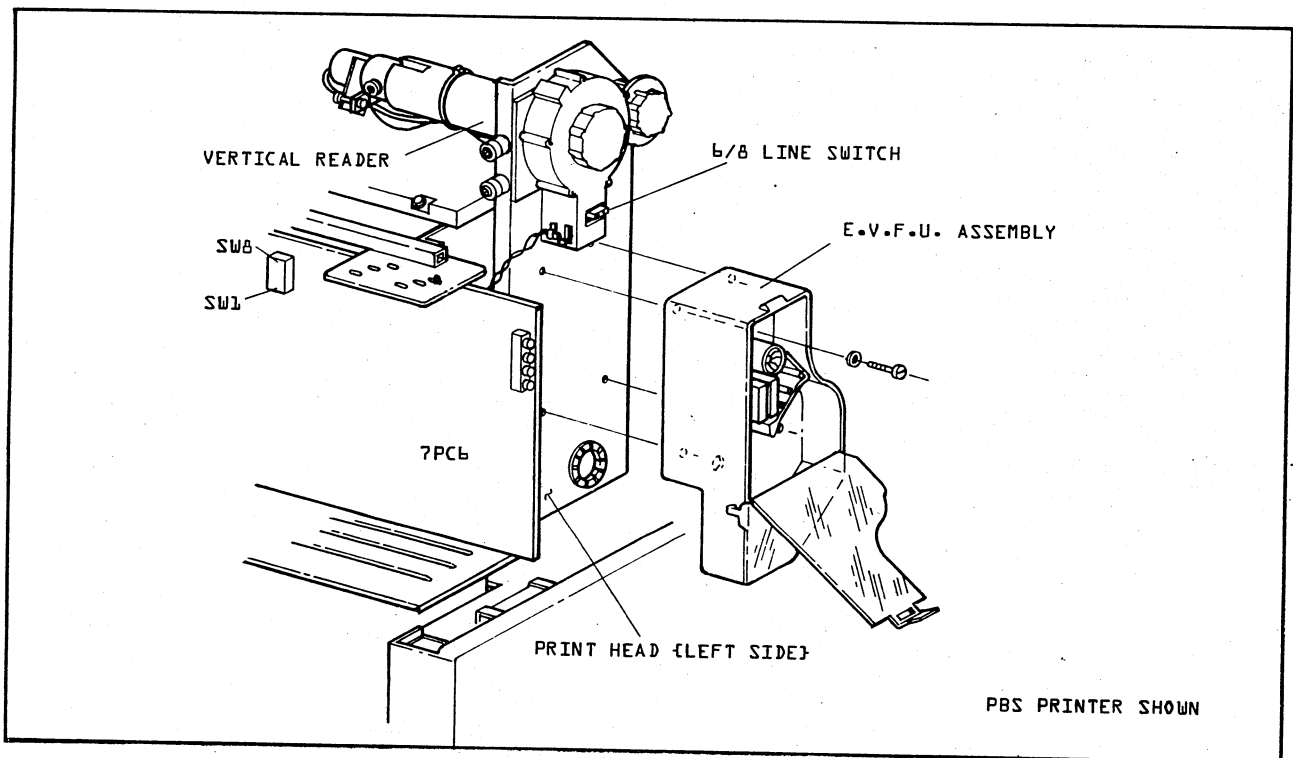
PBS ASSEMBLY INSTALLATION
